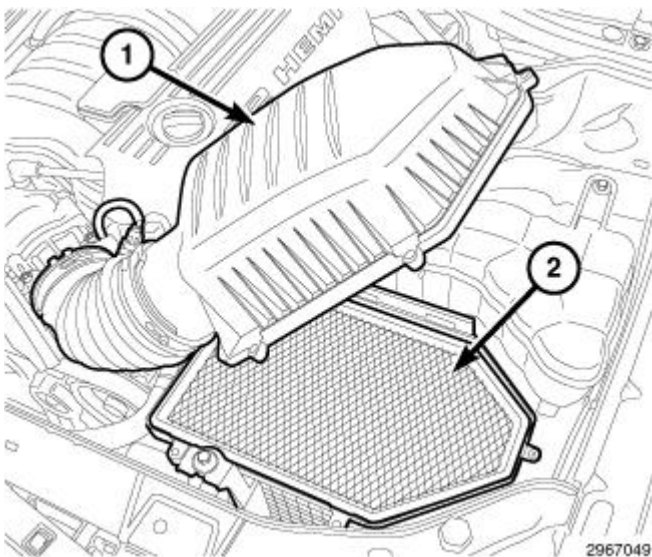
Air Cleaner Housing Cover & Air Cleaner Element
